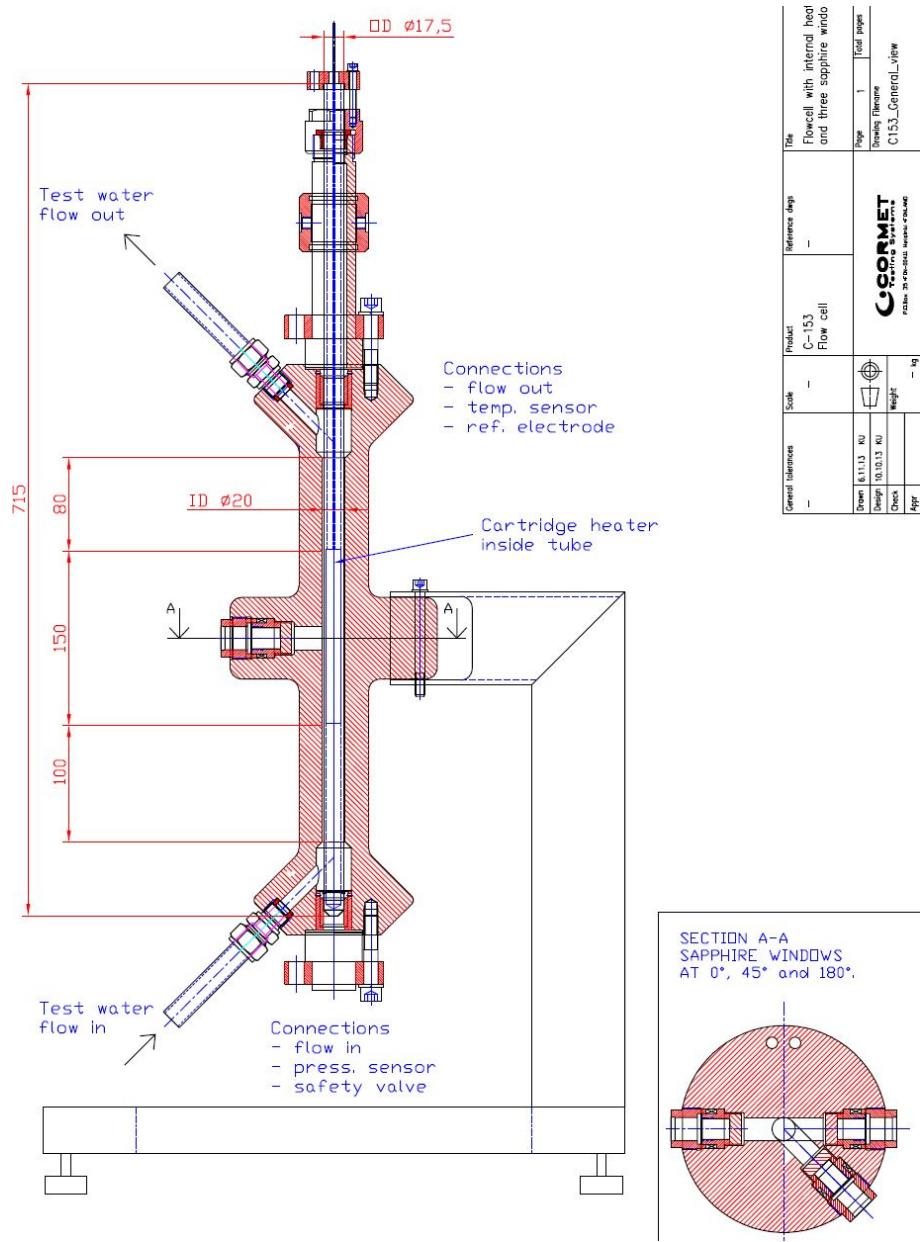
Final autoclave design as rendered by the autoclave manufacturer Cormet Oy.
